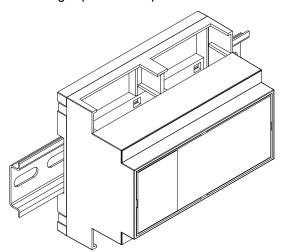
Enclosure mounted on DIN rail (circuit board not shown)
